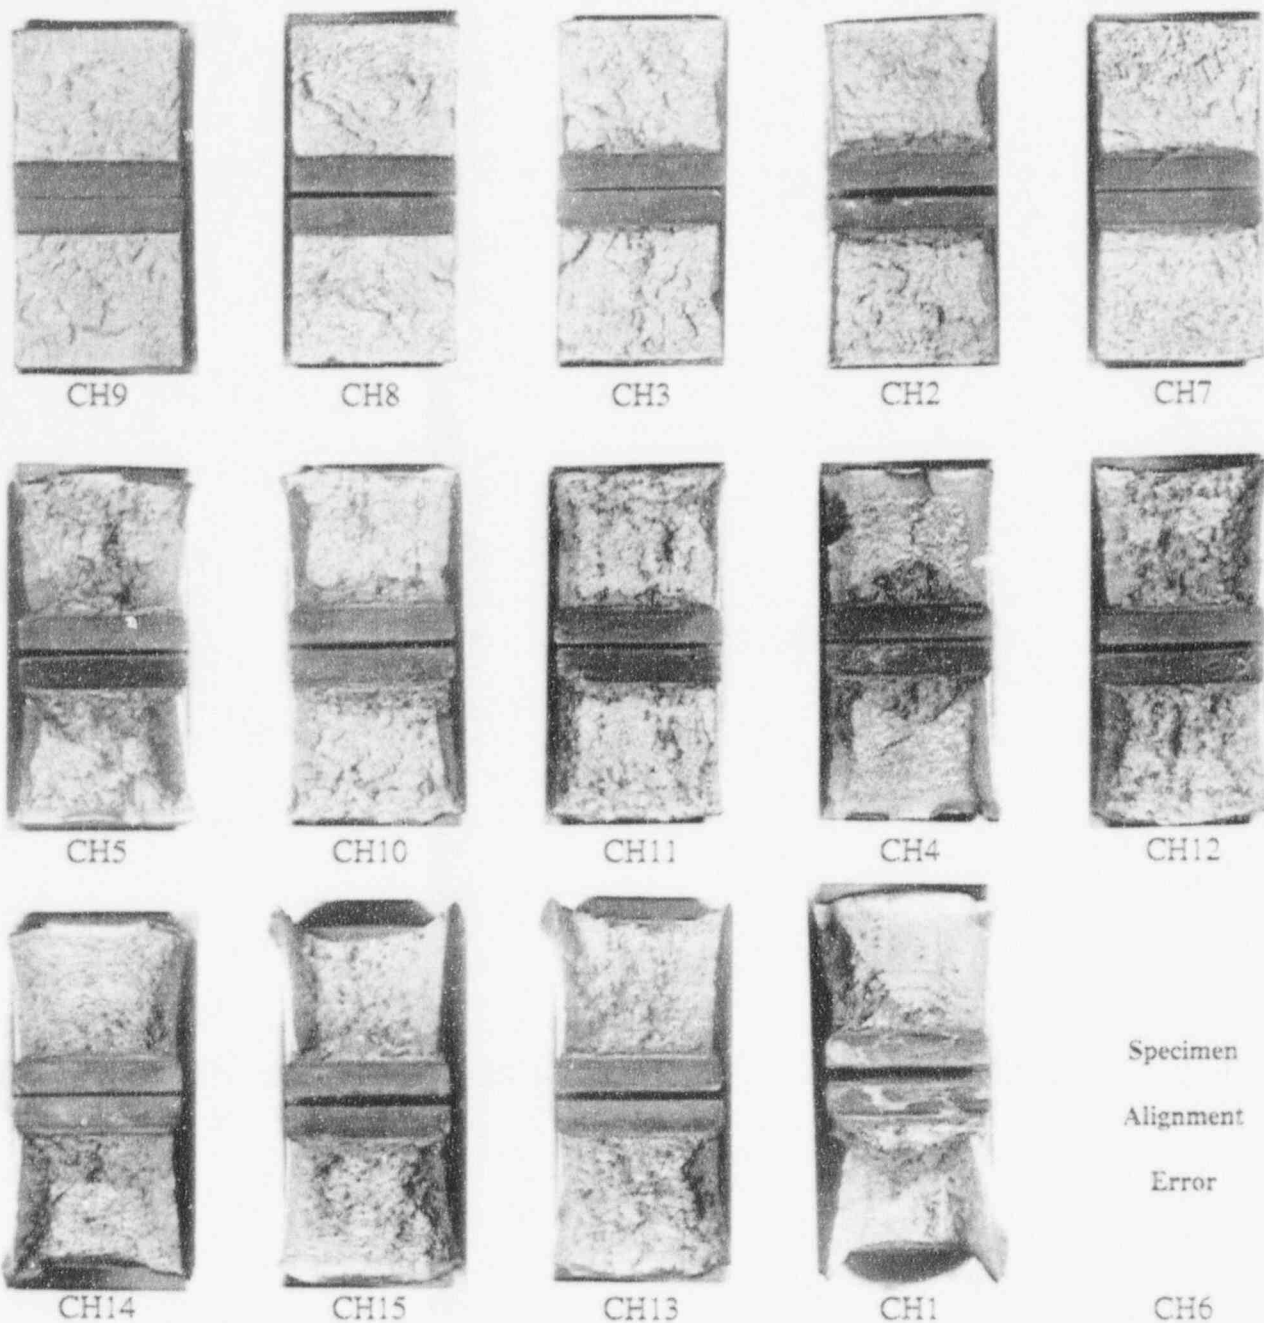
Charpy Impact Specimen Fracture Surfaces of the CPSES Unit No. 2 Reactor Vessel Heat-Affected-Zone (HAZ) Metal
